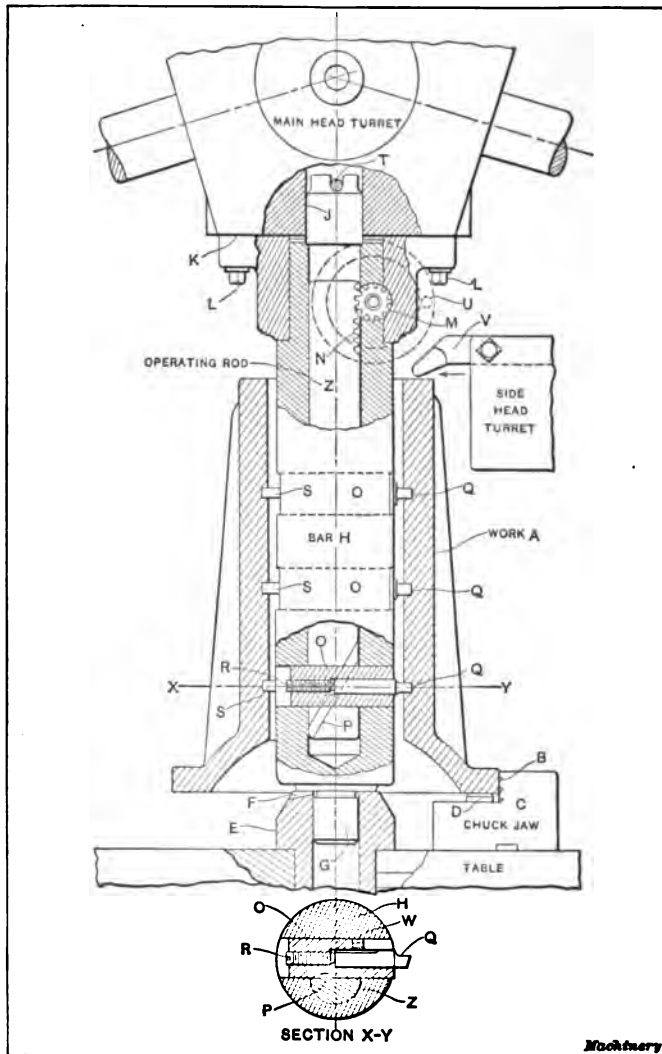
Another Multiple Recessing Tool used in a Vertical Turret Lathe
